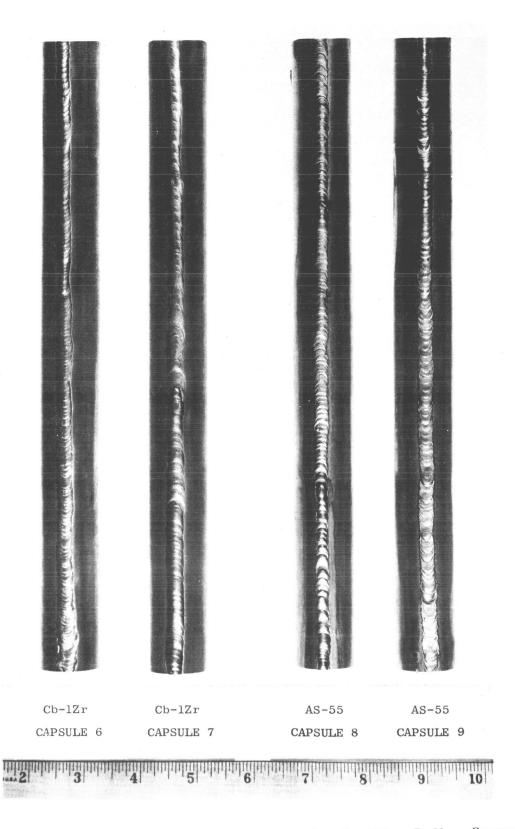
Formed and TIG Welded AS-55 and Cb-1Zr Alloy Reflux Corrosion Capsules.
